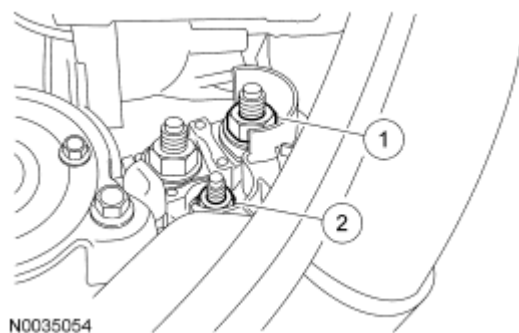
Identifying Battery Cable & Starter Solenoid Terminal Nut
